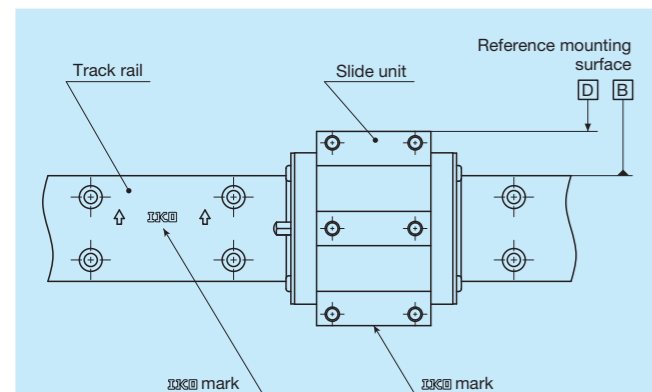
Reference mounting surfaces of Linear Way and Linear Roller Way
